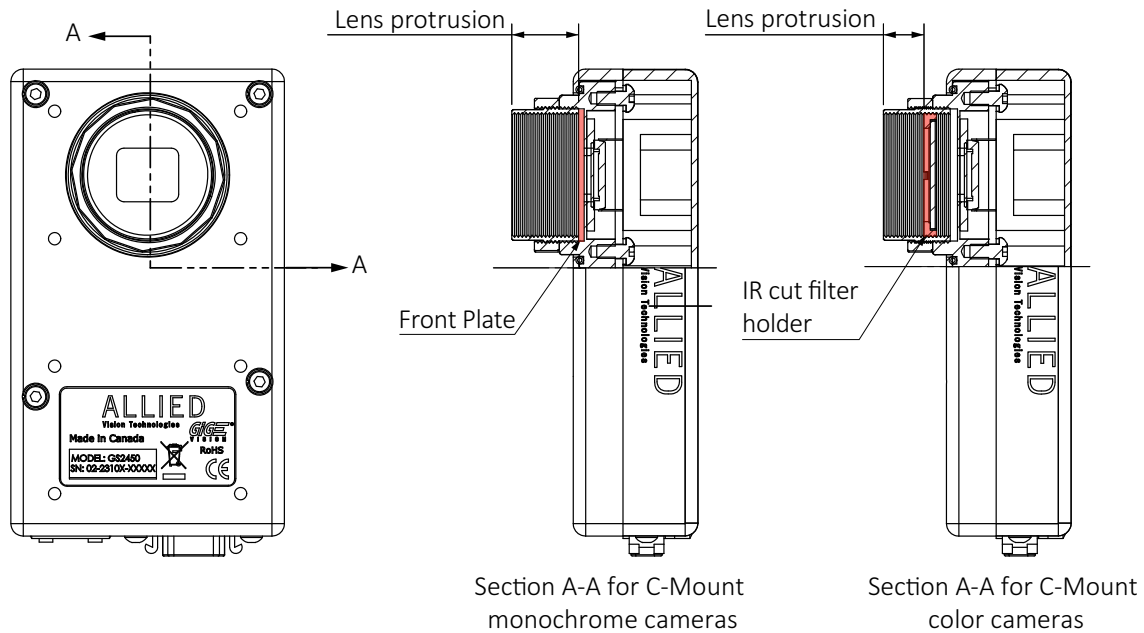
Cross section of typical Prosilica GS assembly with C-Mount
